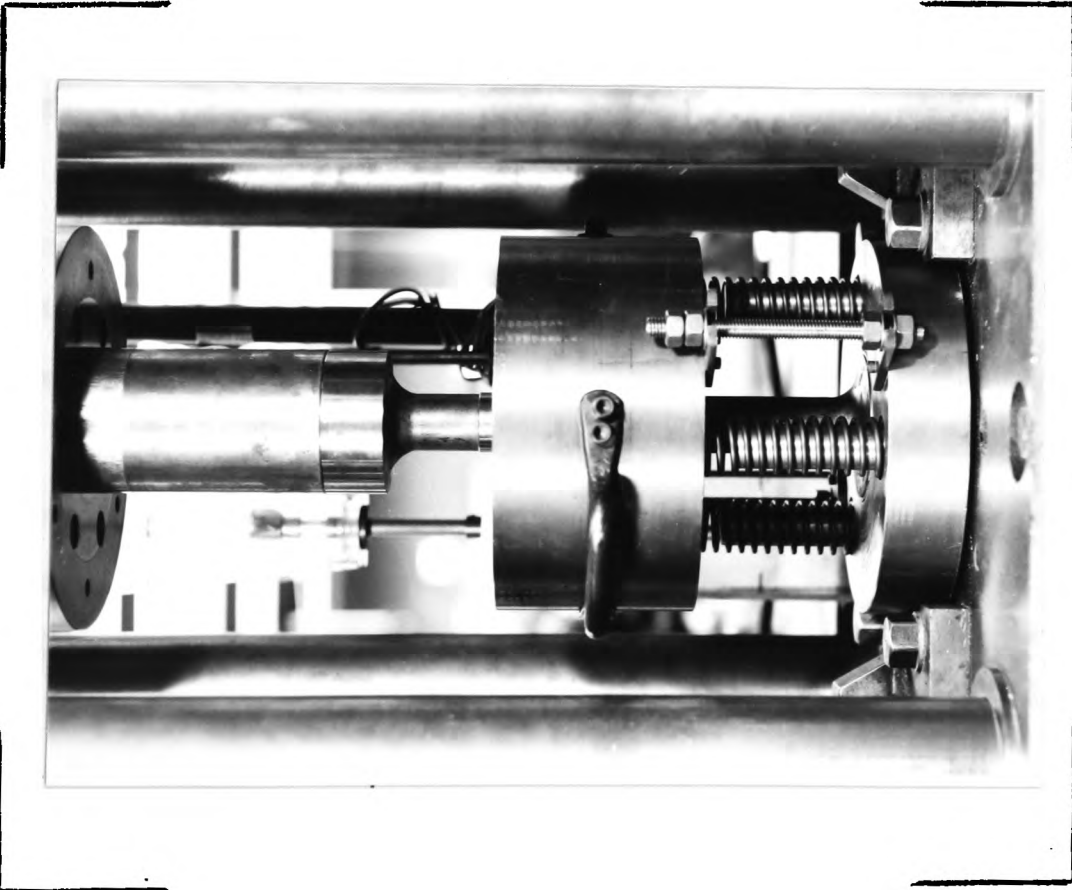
"FLOATING DIE" TOOL USED IN DOUBLE-
